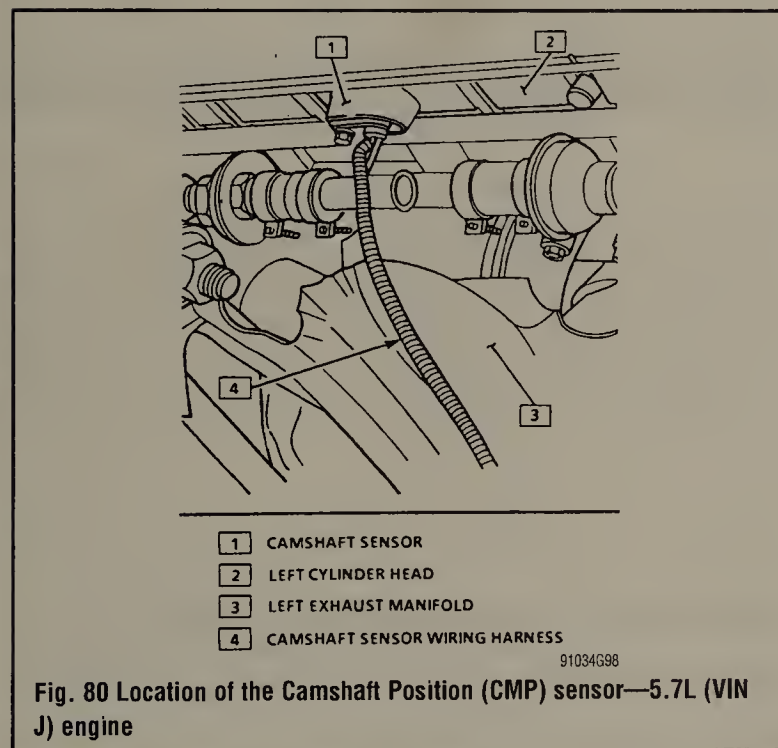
Location of the Camshaft Position (CMP) sensor—5.7L (VIN J) engine
